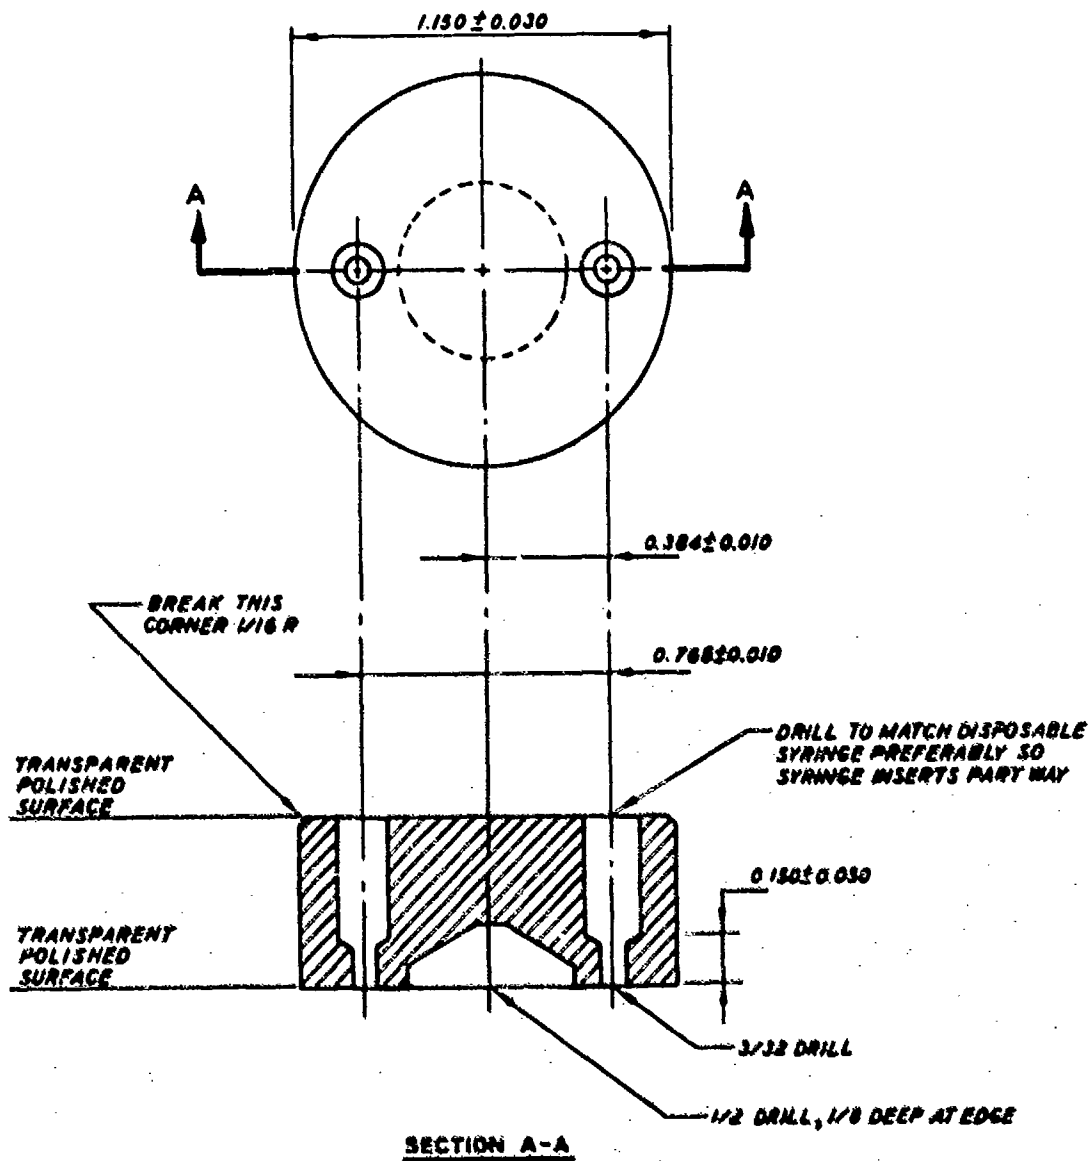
Field calibration fixture. An O-ring with Parker size No. 2-021 is required.
